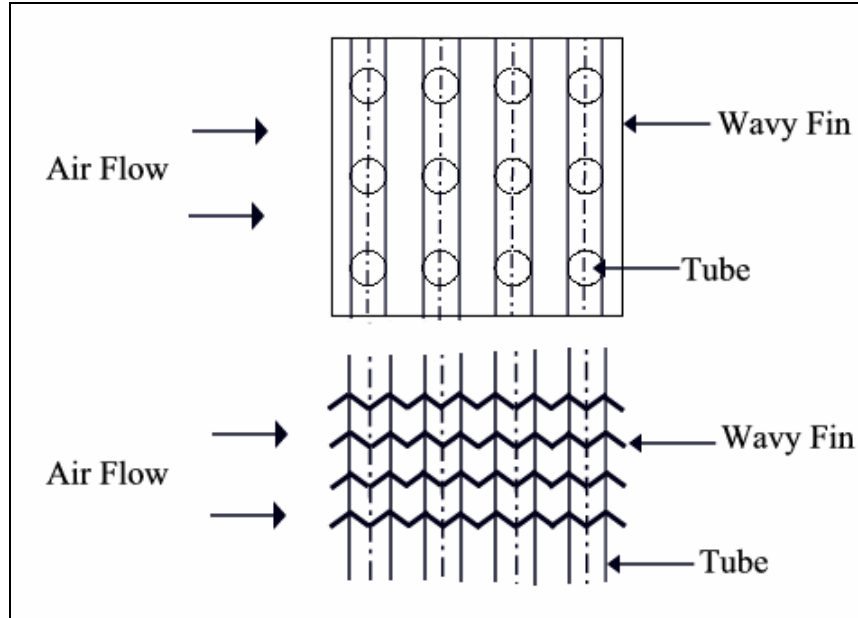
Wavy plate fin-and-tube heat exchanger with in-lined tube layout
